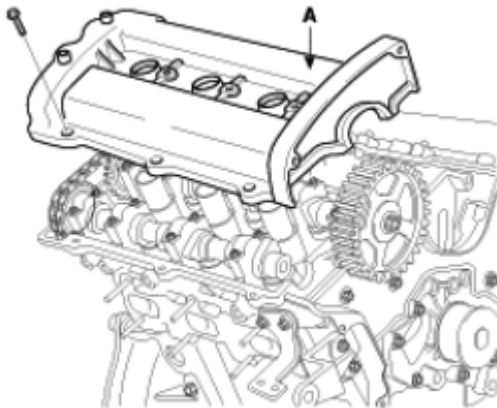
Identifying Cylinder Head Cover With Mounting Bolt
